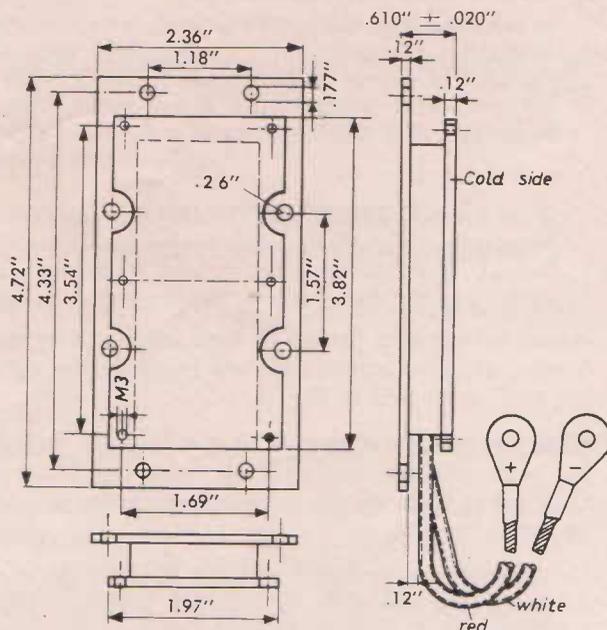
Dimensional drawing of Peltier battery PT 20/20. (The length of the terminals, including mounting tags, is 9½ ins.).
